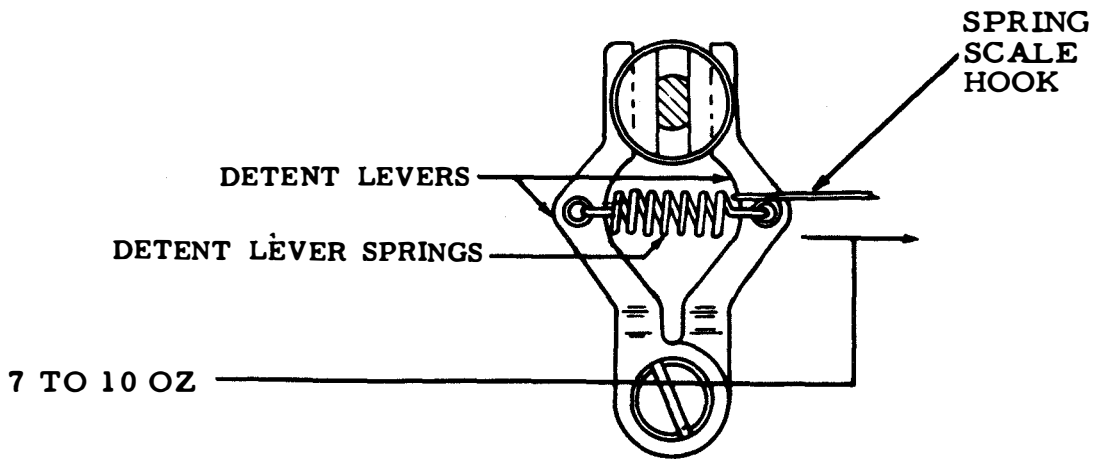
Eccentric Shaft Detent Lever Spring - Top View of Springs on Axial Positioning Mechanism
